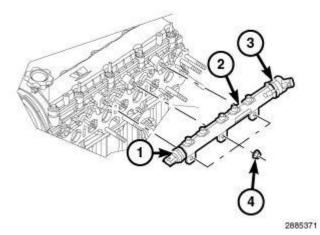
Fuel Rail Pressure Sensor, Fuel Rail, Pressure Solenoid & Nuts Courtesy of CHRYSLER LLC
